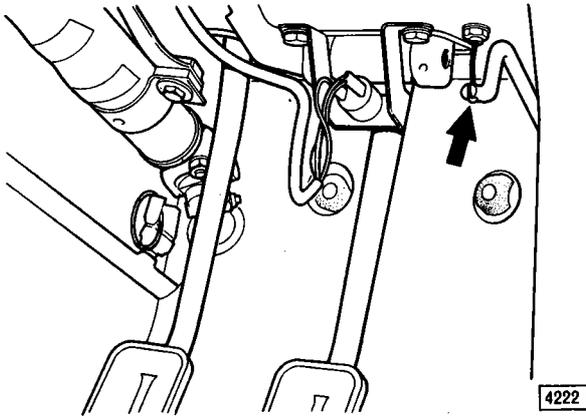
Throttle pedal cable connection and securing nut (Early cars only)
